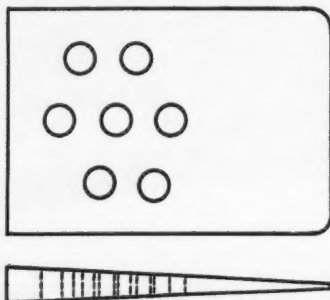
Staggered drilled holes in steel wedge provide grip for pinch bar when removing from grout.
